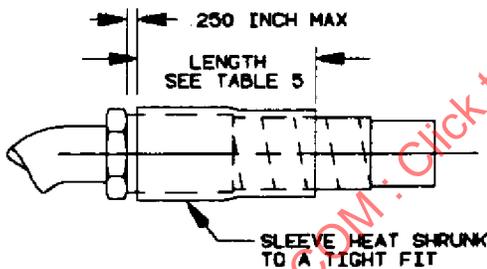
HEAT SHRINKABLE SLEEVES REQUIRED FOR COIL AND TUBULAR ABRASION SLEEVES /6/ AND /7/
